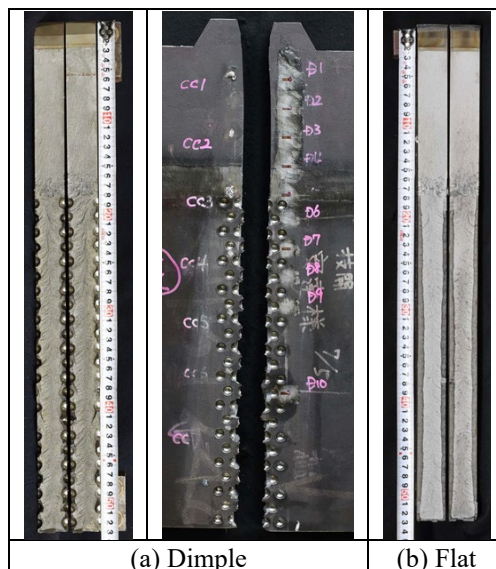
Appearance of fracture surface and crack path for hybrid ESSO tests
